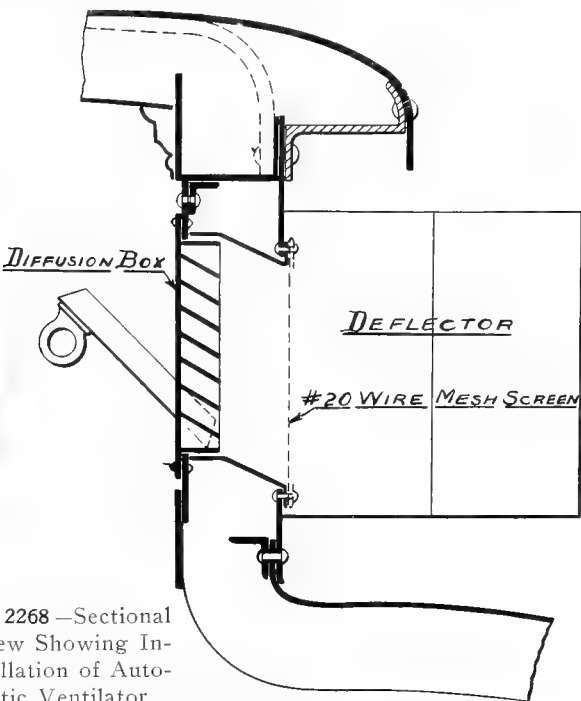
Sectional View Showing Installation of Automatic Ventilator.
